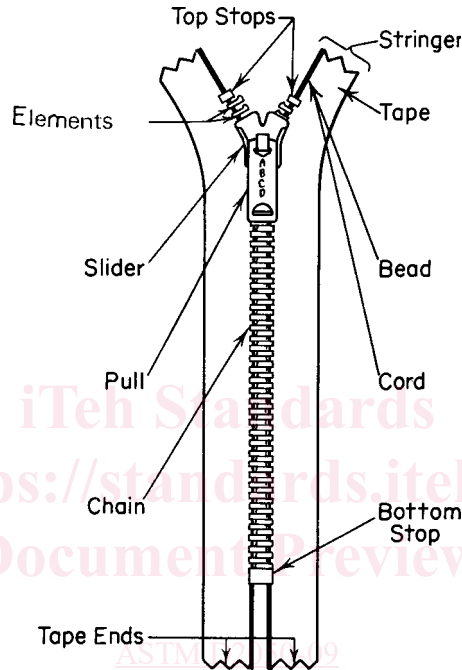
Principal Parts of Slide Fasteners—Individual Element Slide Fasteners
